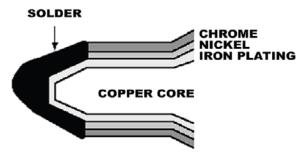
Soldering Iron Tip Cross-Section (not to scale)
